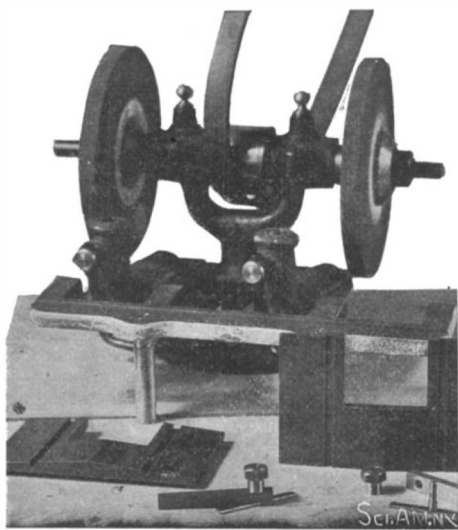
TOOL GRINDER WITH REST DETACHED.
